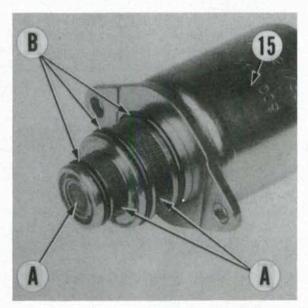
View of solenoid control valve (15) showing mesh filters (A) and "O" ring seals (B).
